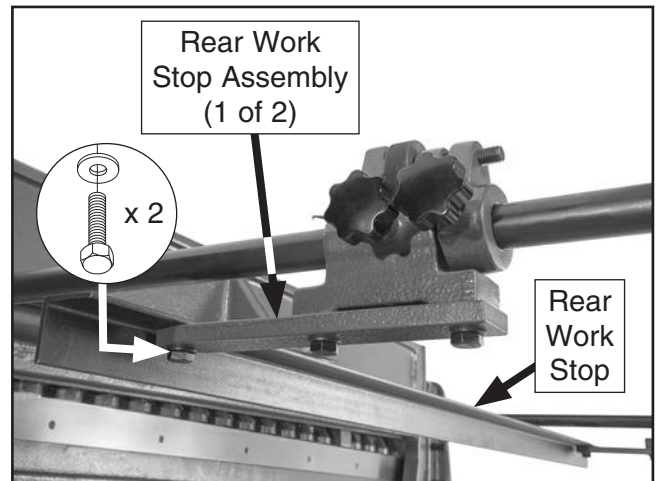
Rear work stop assembly installed on rear work stop support rod.
